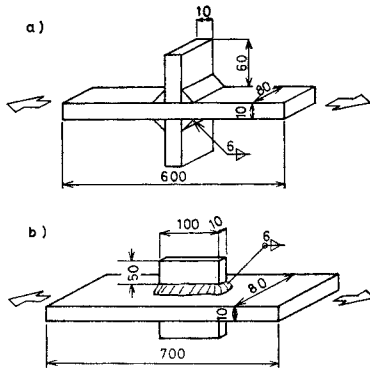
Fatigue test specimens : a) Non-load carrying fillet welded specimen (stiffener specimen); and b) tensile specimen with longitudinal attachments (gusset specimen).
